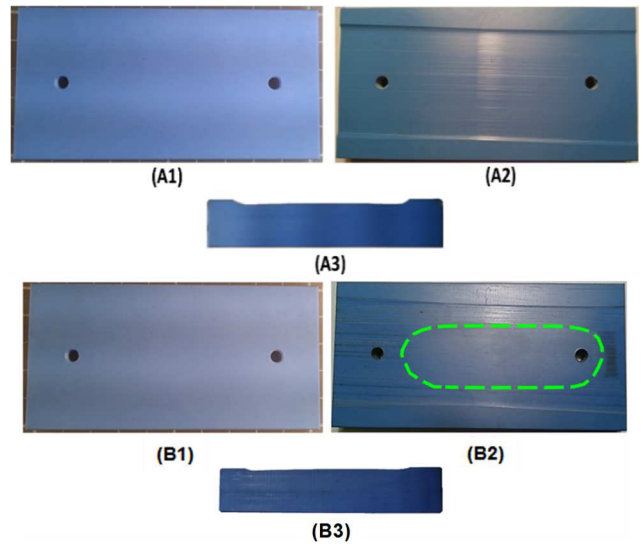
Pads (1) New Pad. Pads (2) Surface wear after 350km. Pads (3) Side View of surface wear. A and B denote wet and dry testing respectively
